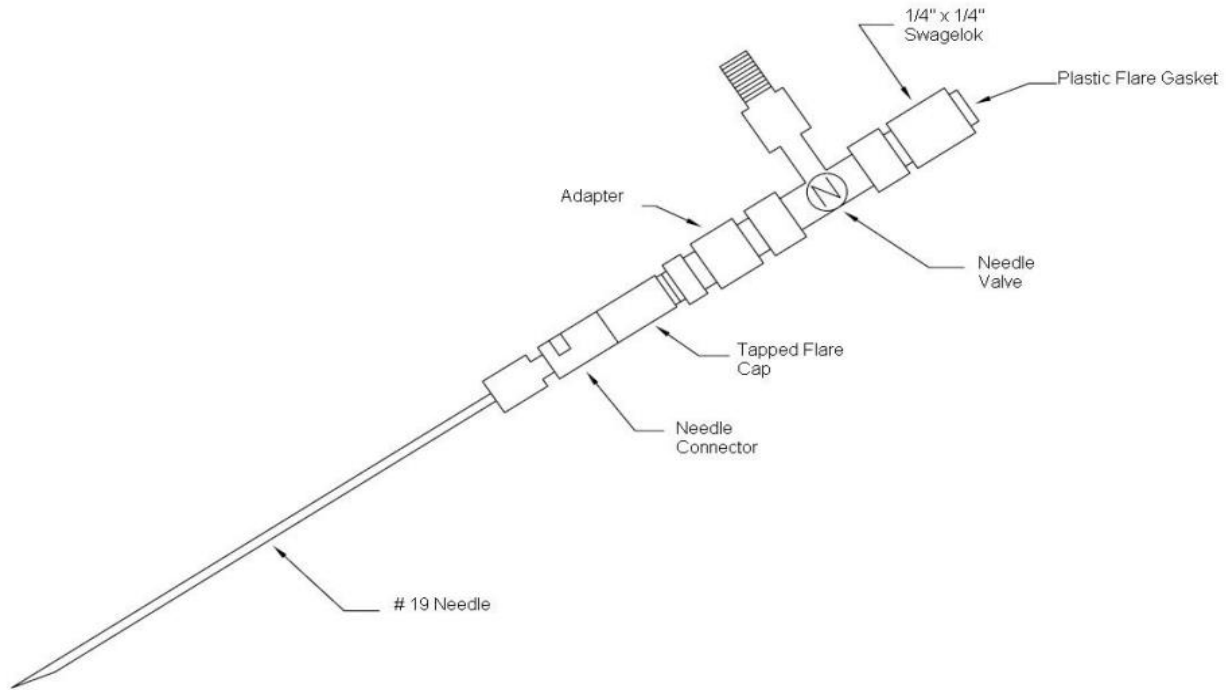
Needle Attachment Assembly for Cylinder Sampling
